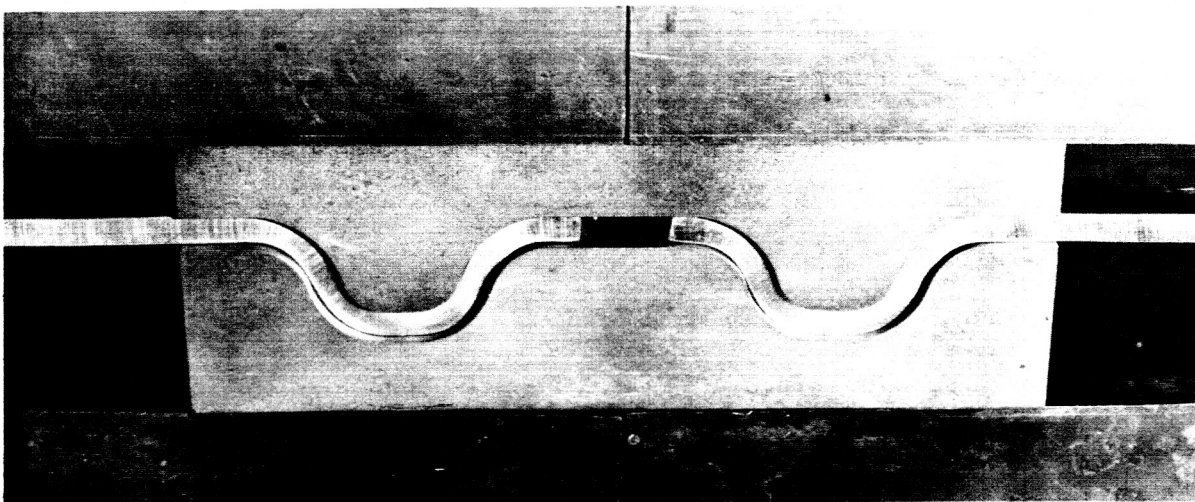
Fully Seated 2219-0 Aluminum Test Specimen in Edge Clamp Fixture
